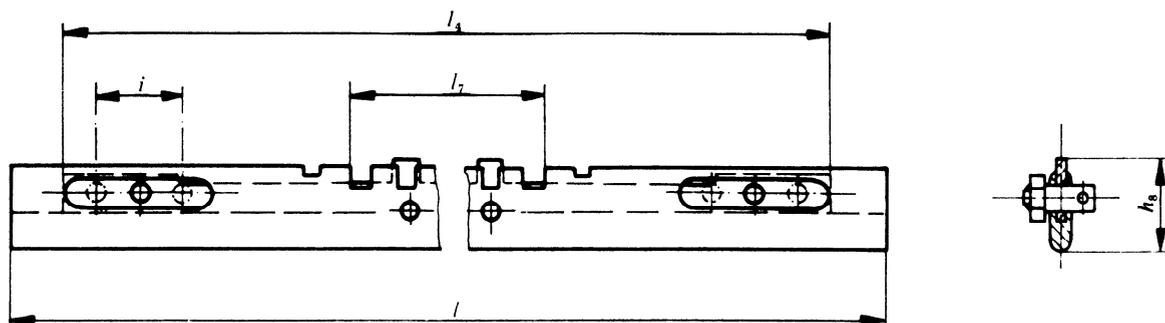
Combination FIGURE 6 – Assemblage ФИГУРА 6 – Сборка
